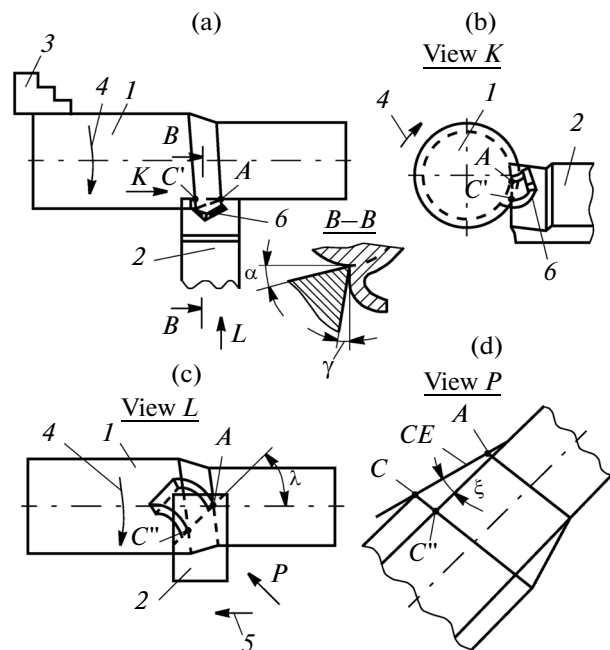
Operation of pass-through lathe cutter (a) and its position with respect to the blank in view *K* (b), view *L* (c), and view *P* (d); CE, cutting edge.
